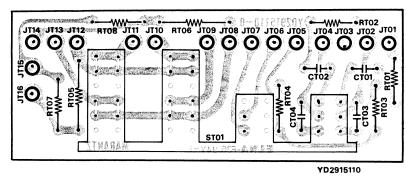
Main and Remote Switch Assembly (PT01) Component Locations
